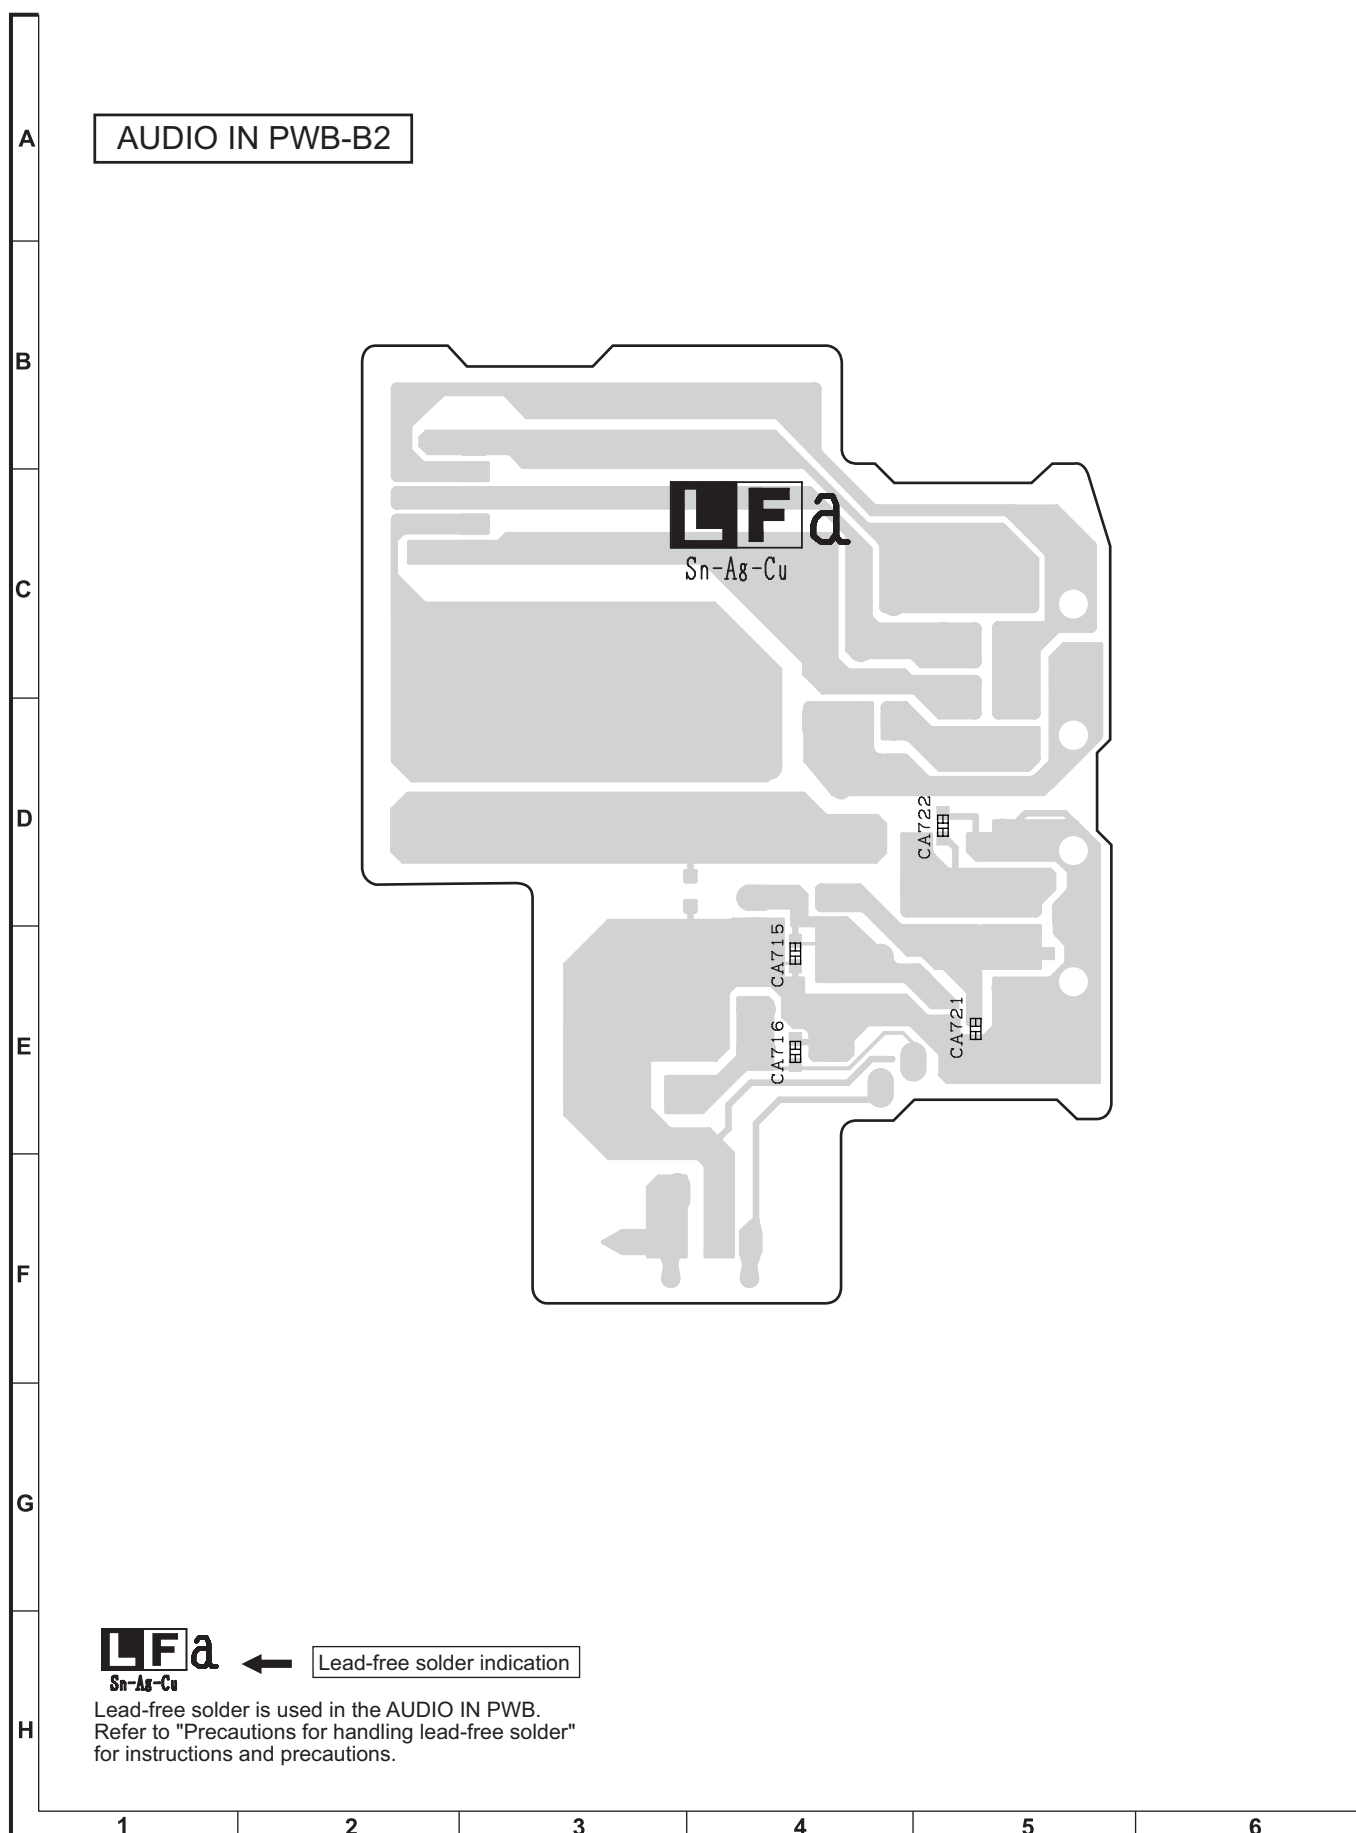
WIRING SIDE OF AUDIO IN PWB (BOTTOM VIEW)
